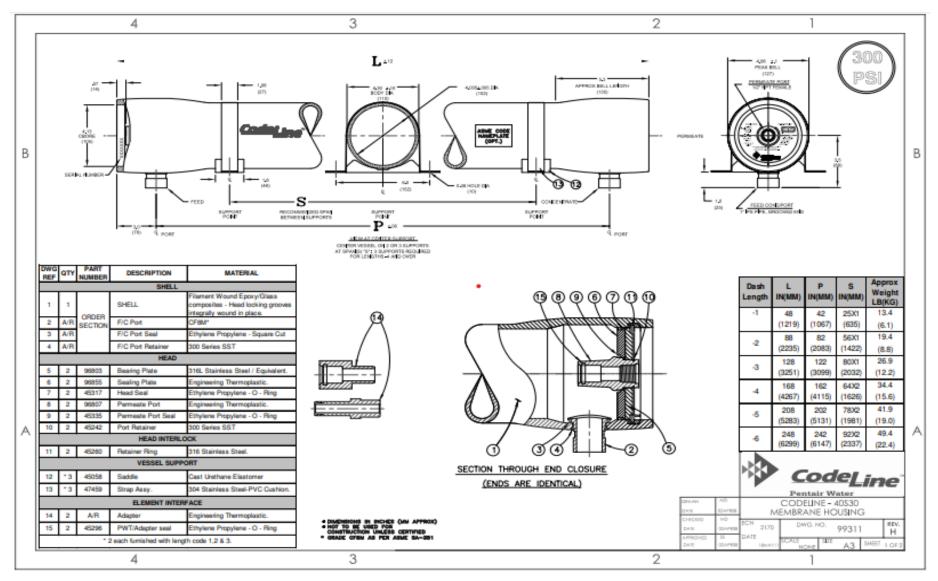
Drawing of Pressure Vessel (For 4-RO Elements)
